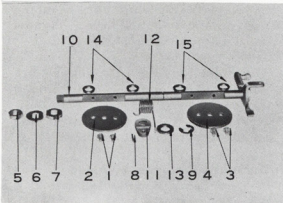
Throttle Valve V1582 Mechanism Disassembly
